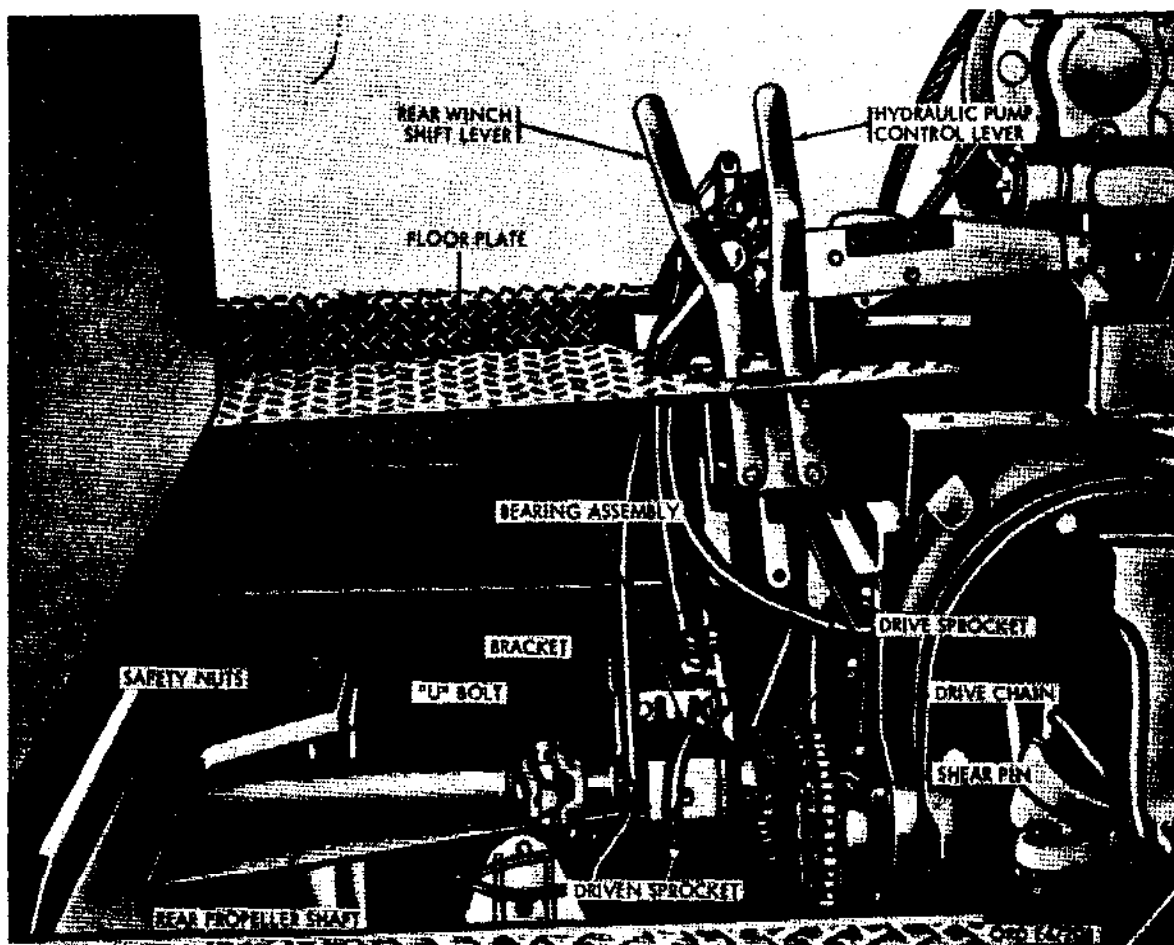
Left side view of rear end of wrecker body with floor plate raised - M62
